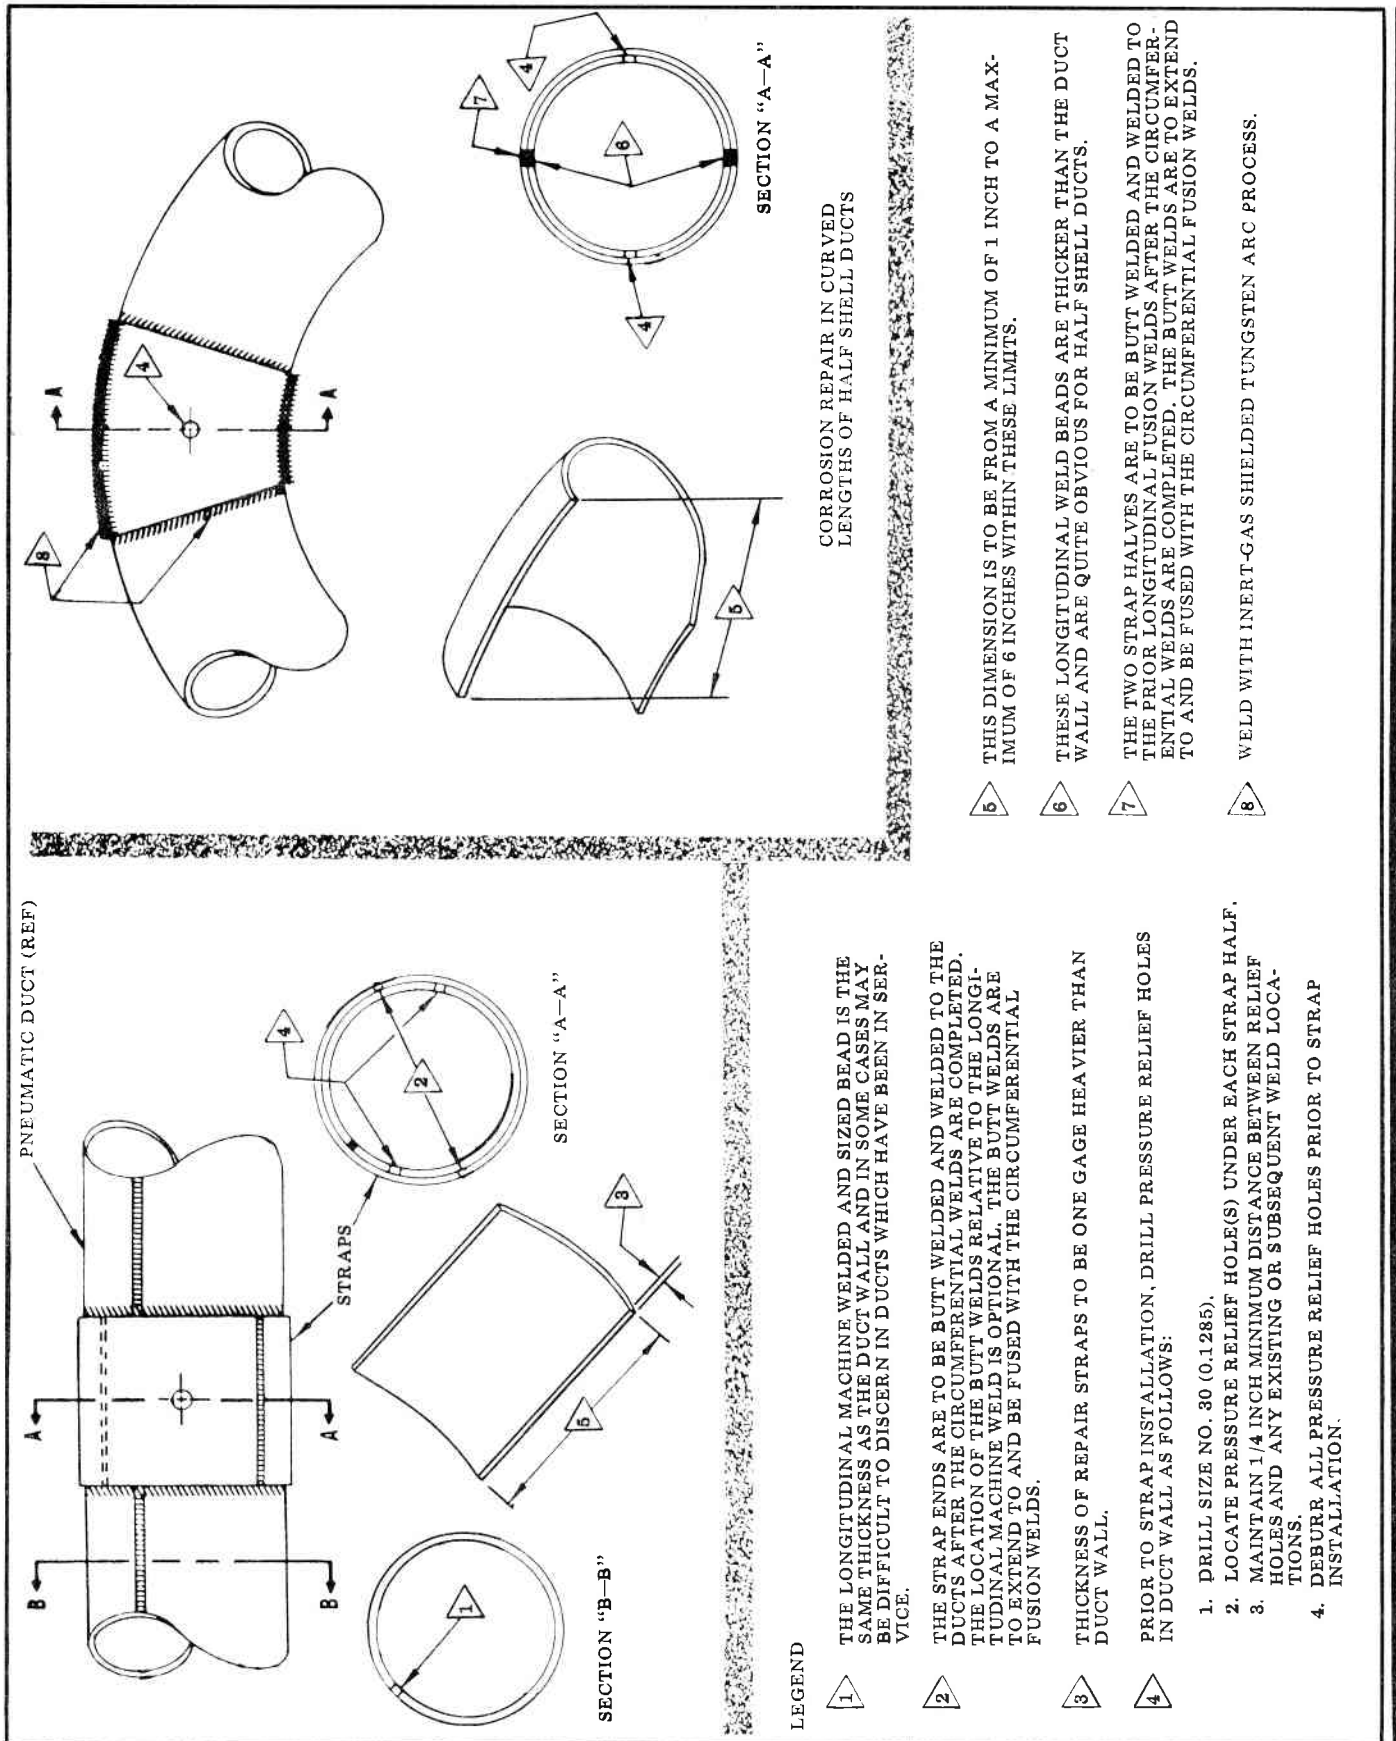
Strap Installation Corrosion Repair – Bleed Air Duct
